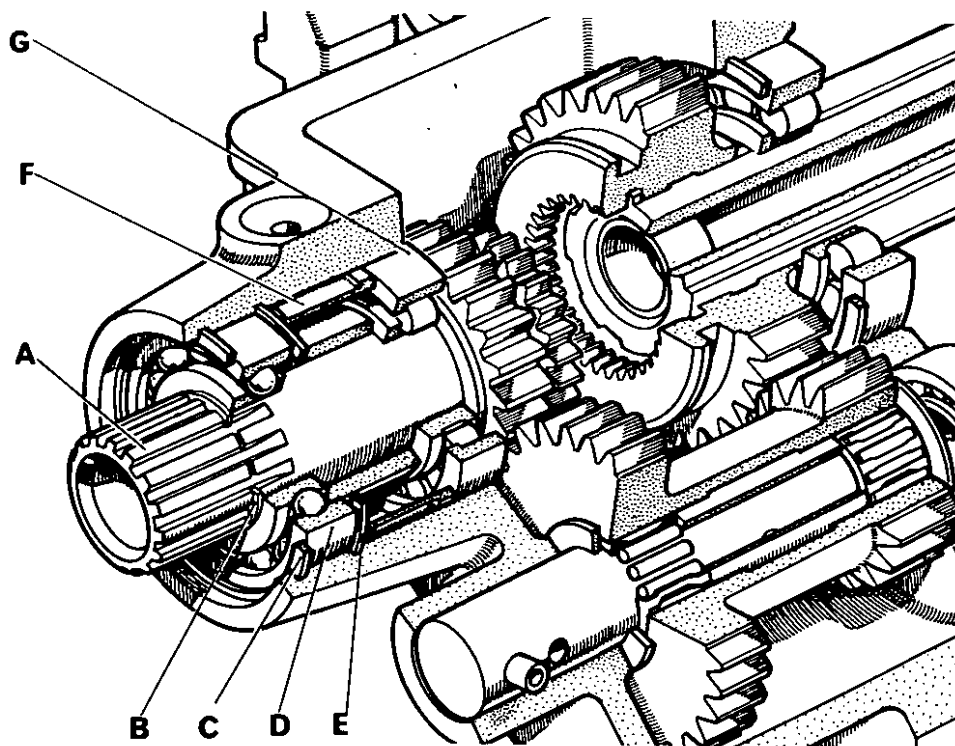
DRIVE GEAR — 12-SPEED GEARBOX
